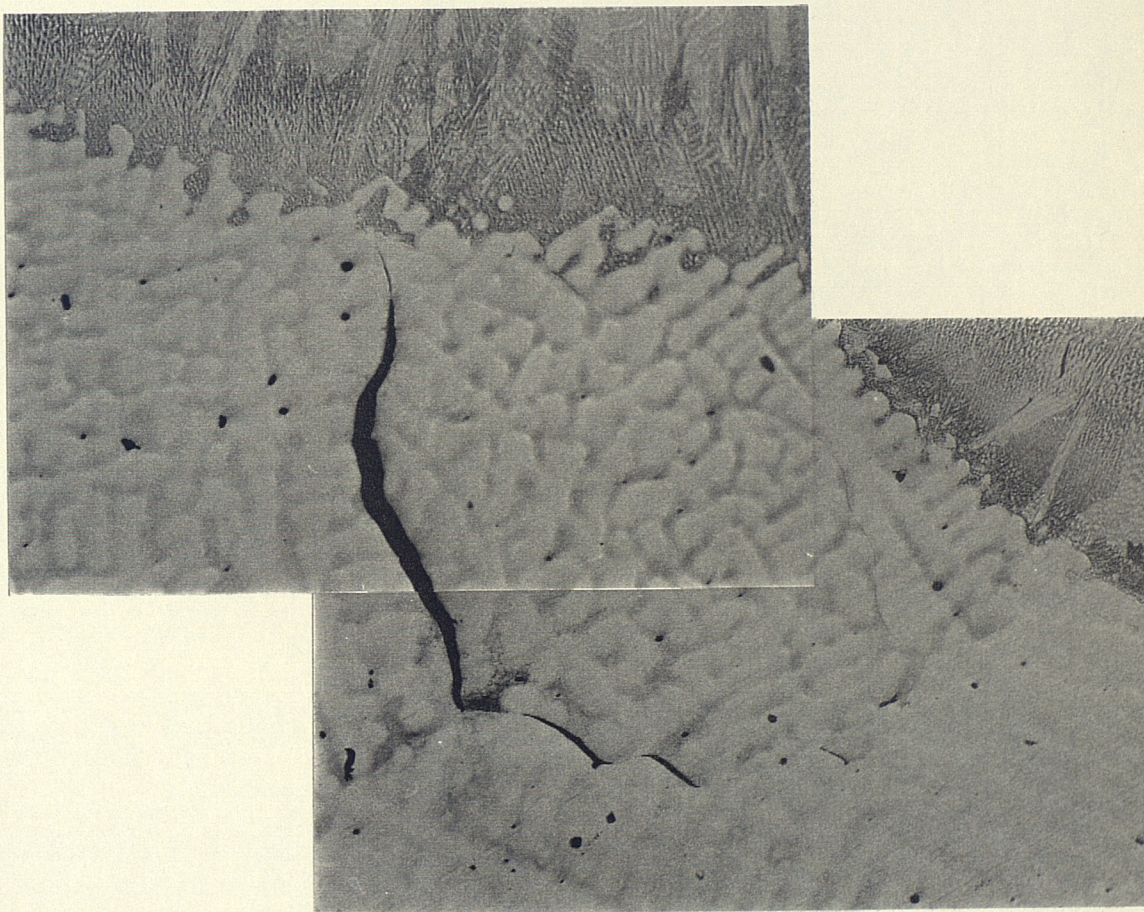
Sub-surface weld induced crack in WBL-3794. x50.
